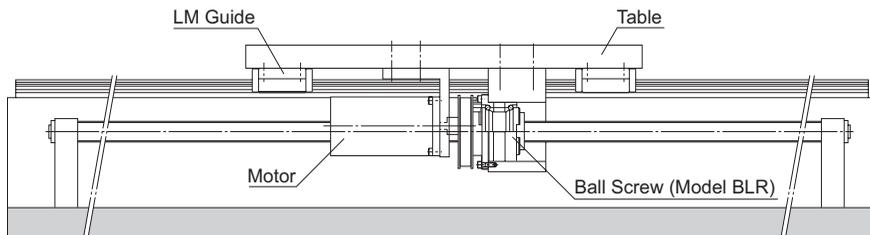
Example of Installation on the Table (Screw Shaft Fixed)
